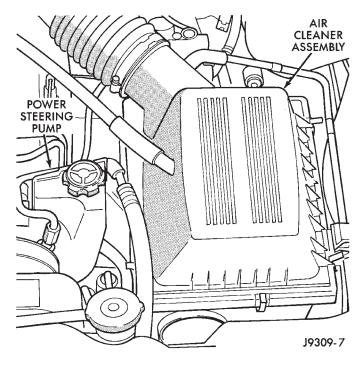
Air Cleaner Assembly & Power Steering Pump
